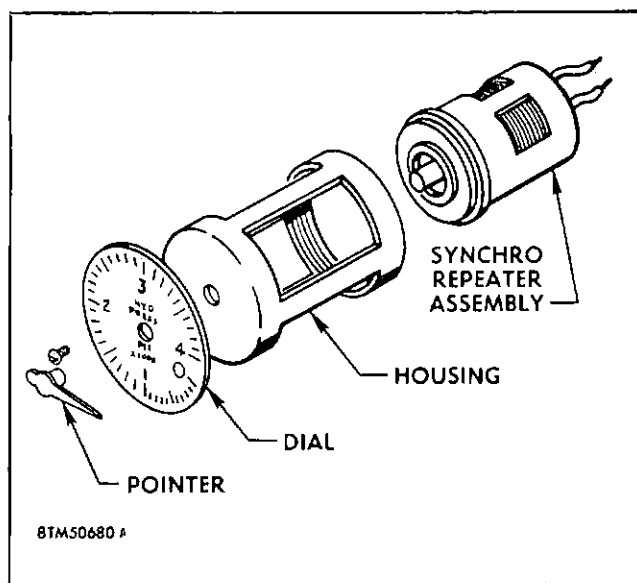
Hydraulic Pressure Indicator—Internal View
